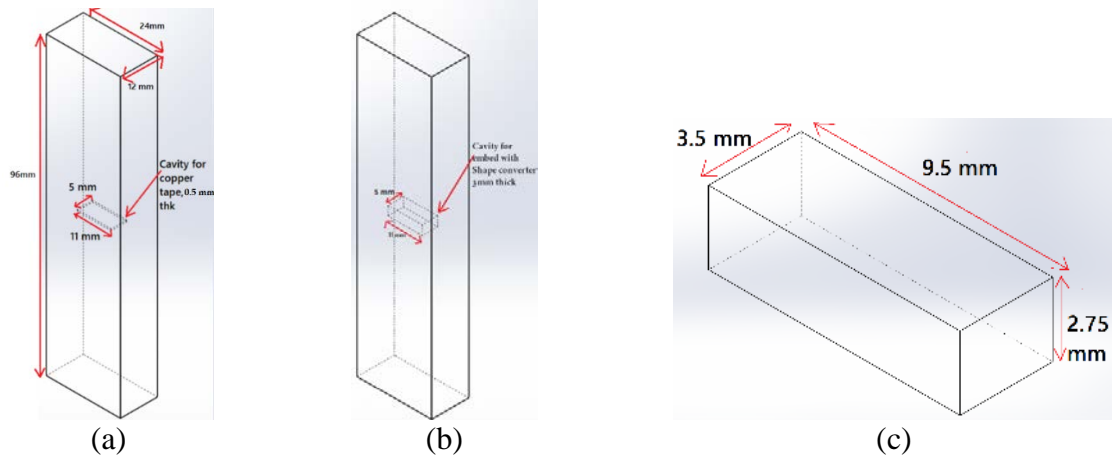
Specimen design for copper tape embed (a), and shape converter embed (b), with the dimensions of shape converter shown in (c).
